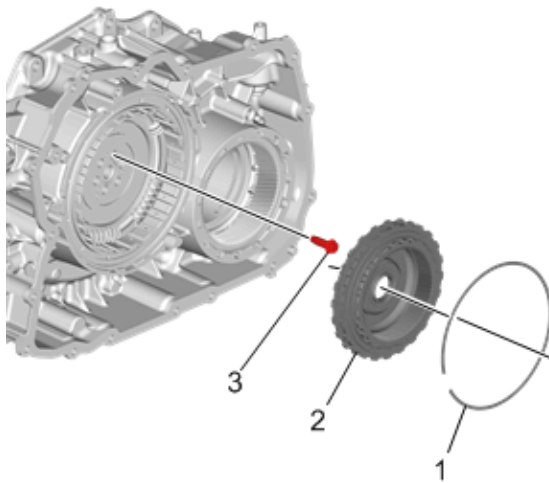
Input Internal Gear, Retaining Ring And Transmission Torque Dampener Bolts
